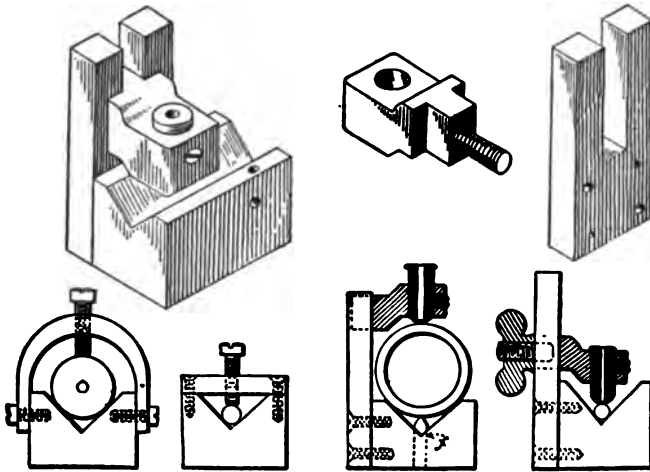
V-BLOCK WITH BUSHING HOLDER
